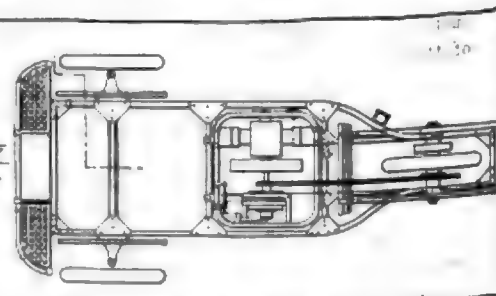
WAGENHALS THREE-WHEEL CHASSIS
